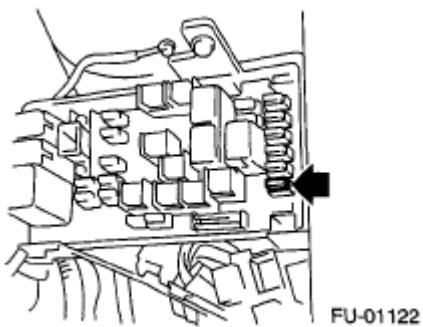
Identifying Fuse Of Fuel Pump To Main Fuse Box
